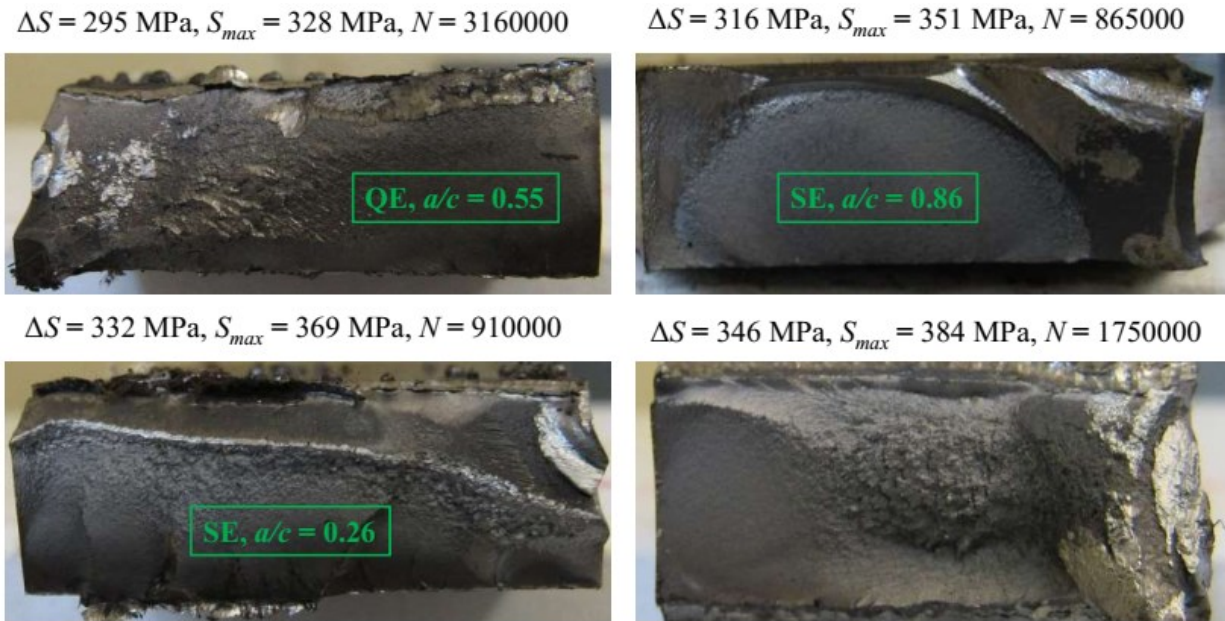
Fracture surfaces for HFMI treated A514 steel specimens under CA loading
